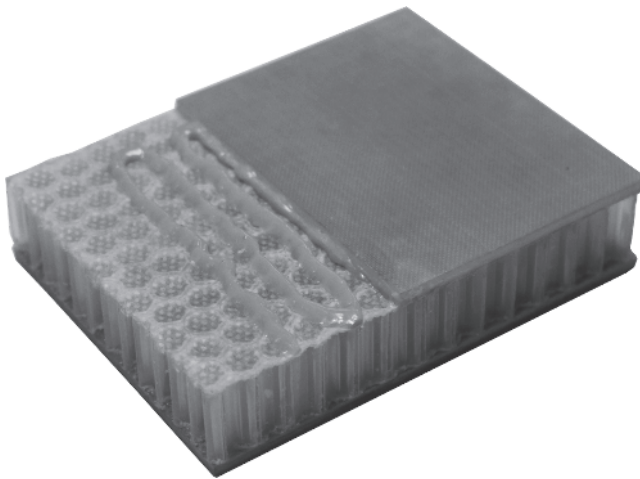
A typical sandwich structure used in lightweight composite construction, showing the adhesive used to bond the skin to the core.
